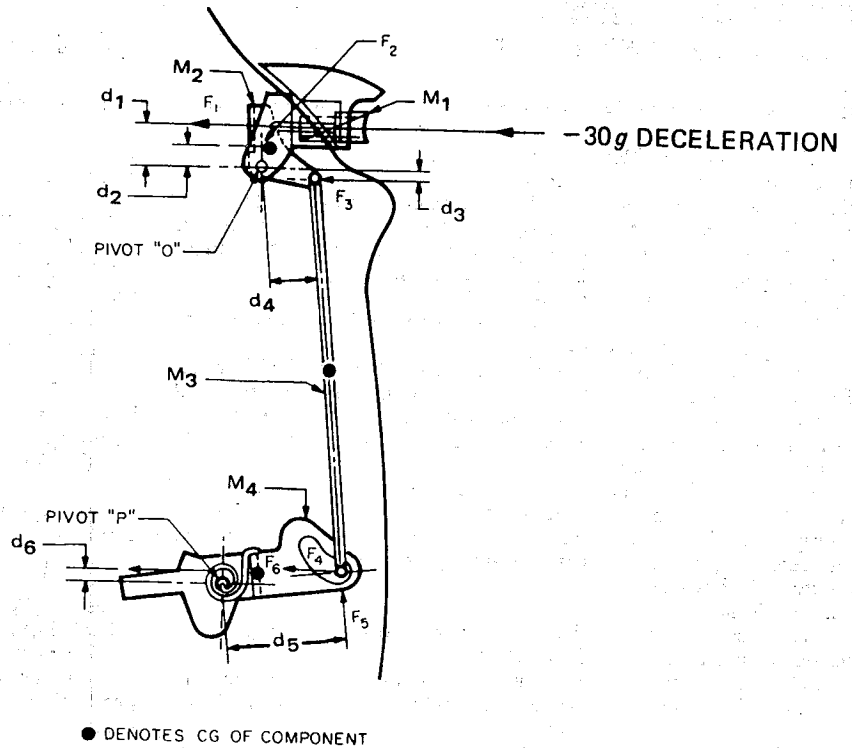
DOOR LATCH—STATIC LOAD FIXTURE
